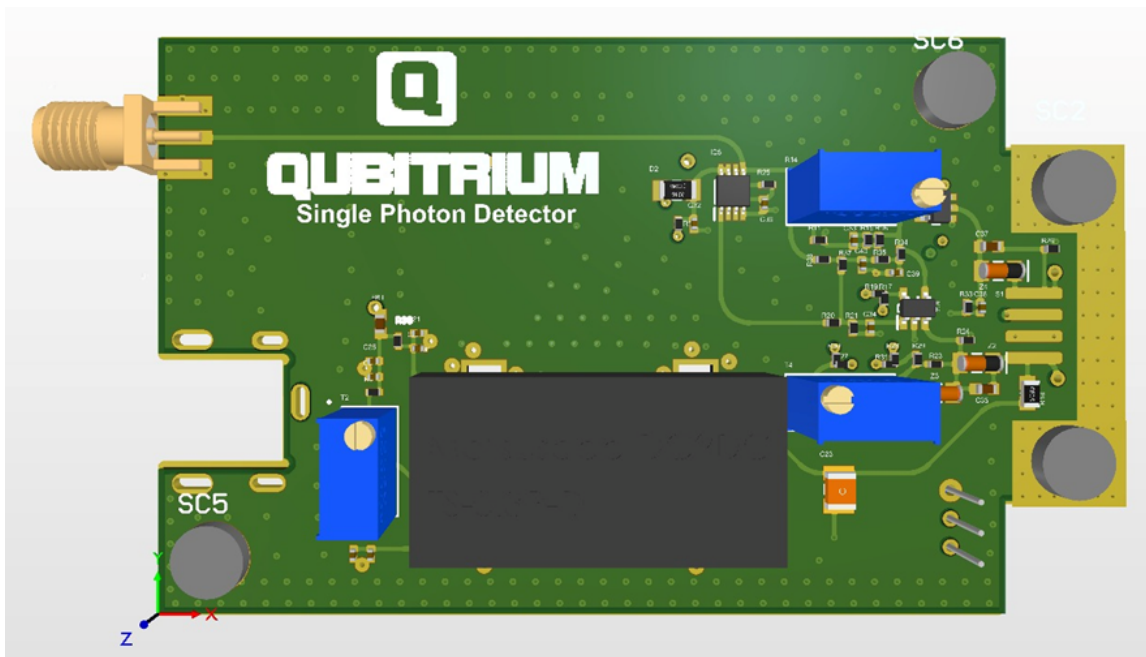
The 3D view of the cathode sensing design's PCB (Top view)
